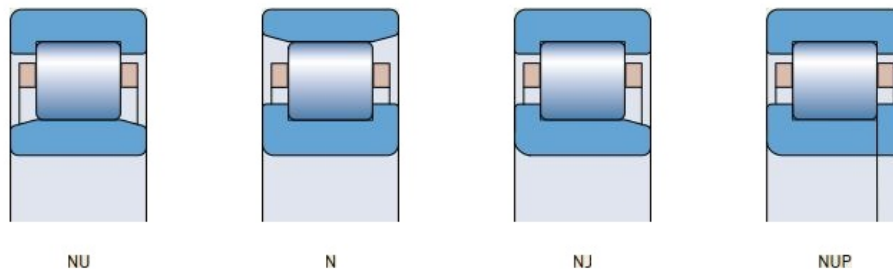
SKF basic designs of Single Row Cylindrical Roller Bearings [2]
